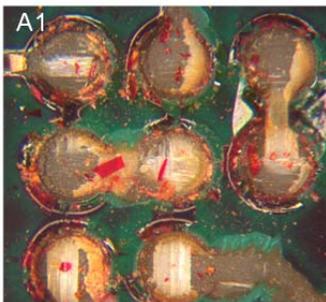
Example corner dye-and-pry on 292MAPBGA after 4000 cycles. This image is viewing the PCB surface.
